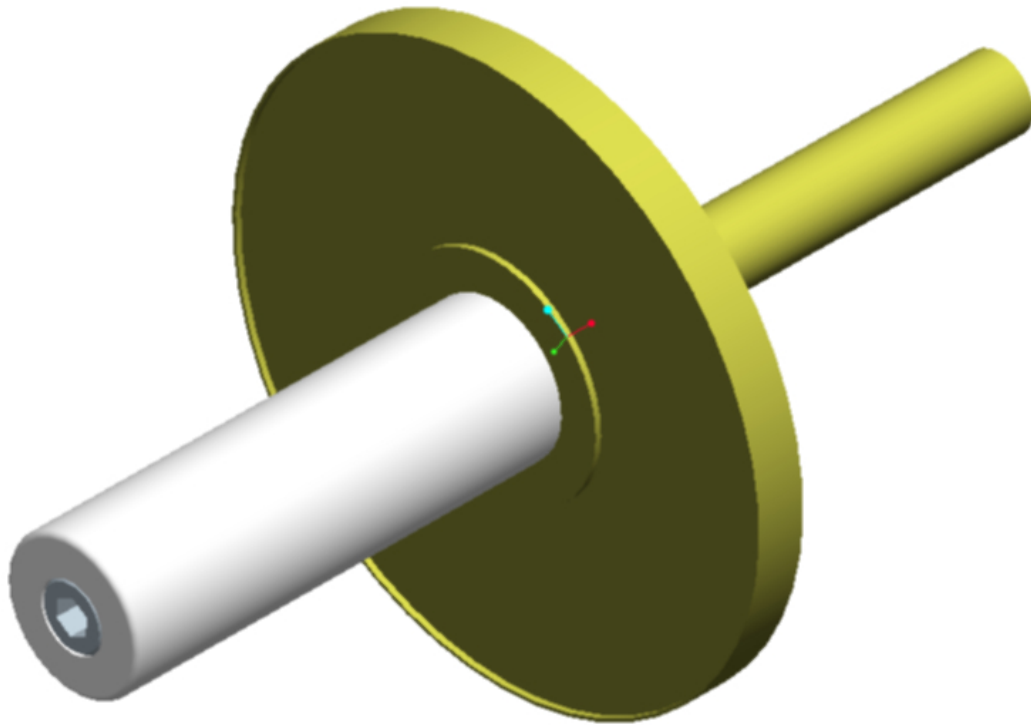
Modified piston assembly with a complete PTFE piston, Revision 01.
